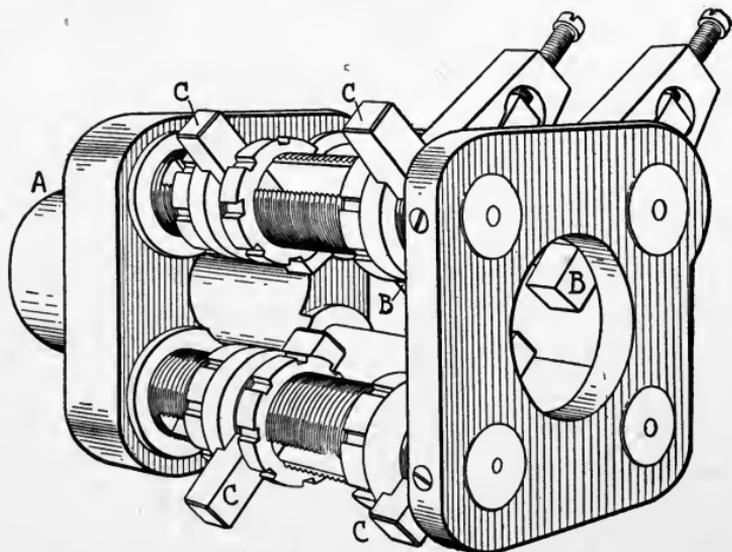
Box Tool Holder for Two Tools and Four Back-Rest Jaws
